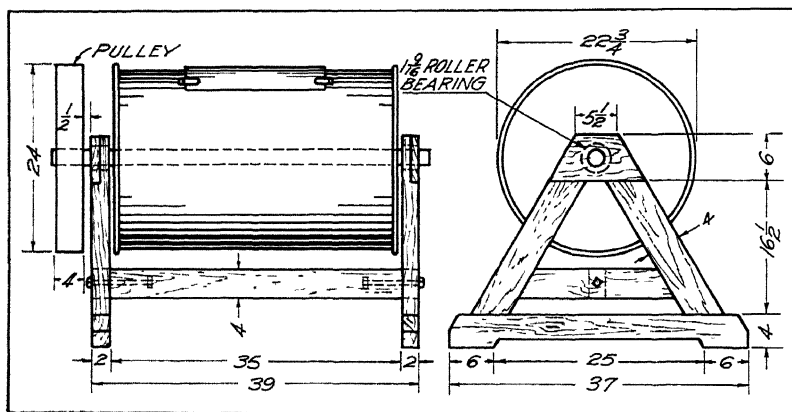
This improvised ball mill, made from an old iron barrel, can be used for blending clay for casting. The bearings are from an old car or truck. The pulley can be built up of laminated wood, and should run about 80 r.p.m. Smooth, river rock can be used for the pebbles.
